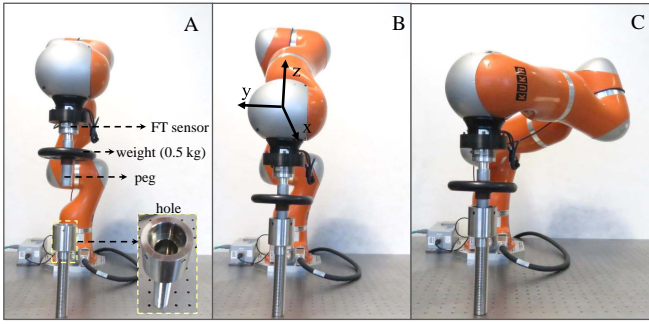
KUKA robot in initial (A) and during the assembly task without (B) and with (C) the optimization of the SFE geometry.
